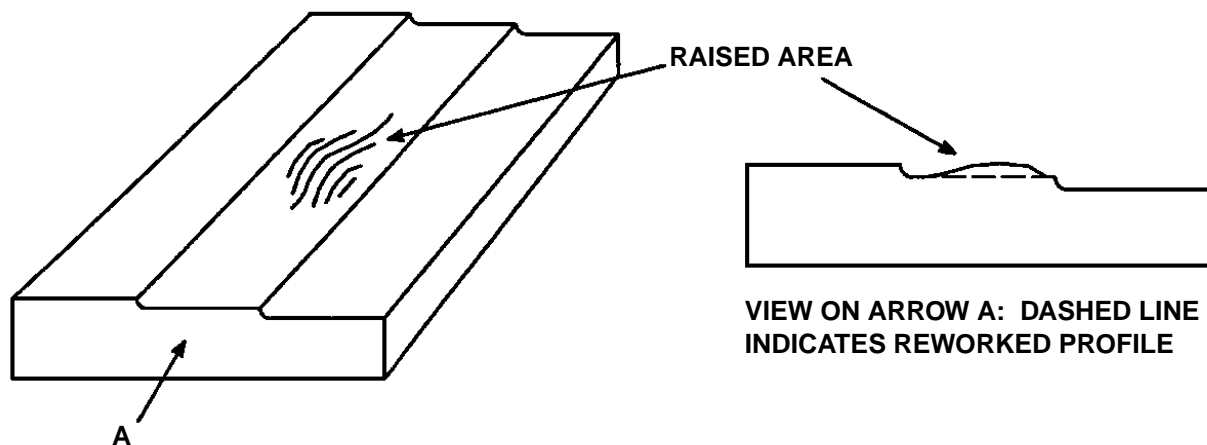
REWORK OF CHEM-MILLED SURFACES (TYPICAL)
